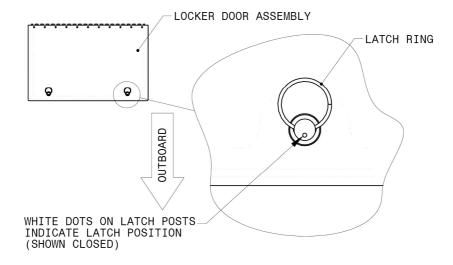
Showing Inboard Hinging Style Locker Hatch
